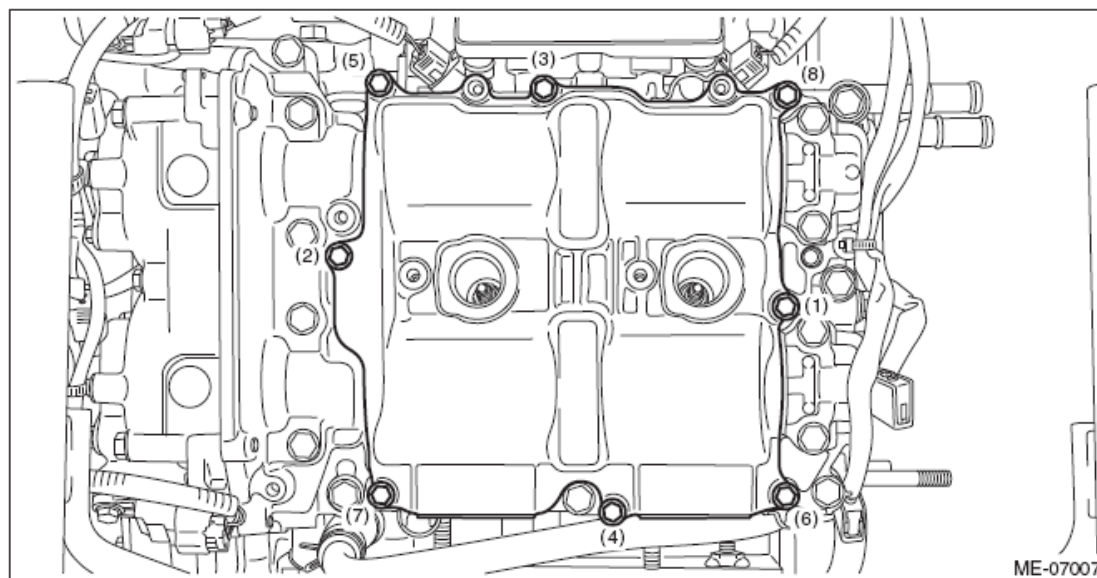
Identifying Rocker Cover Bolts Tightening Sequence
